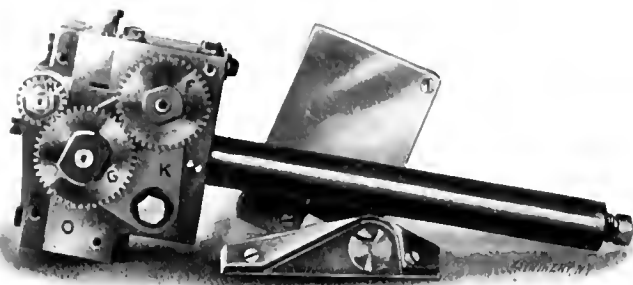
Front Side of Spiral Gear-cutting Attachment for Steel Gears, showing Gearing
